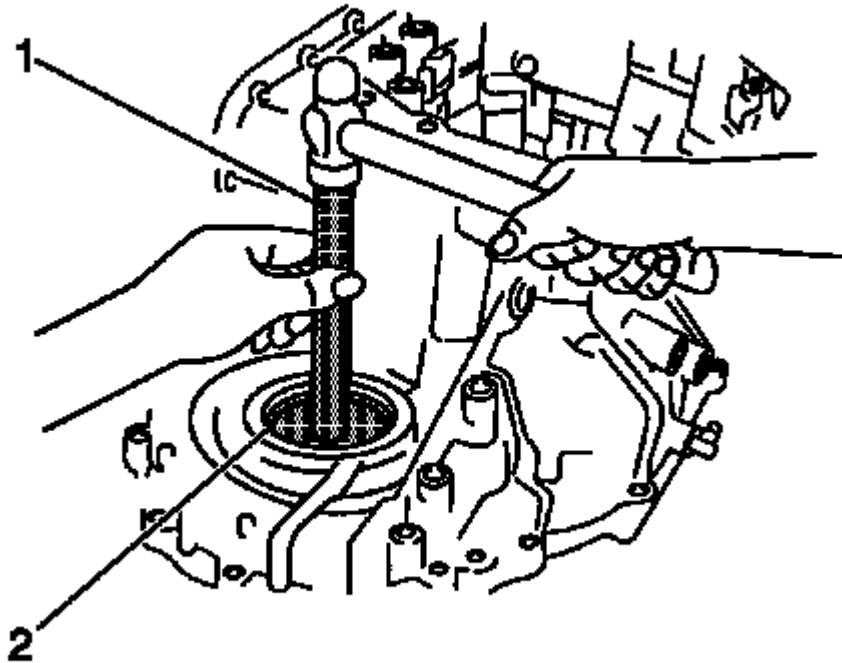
Removing Transaxle Case Side Bearing Outer Race & Shim Using DT 46463 & DT 46465
